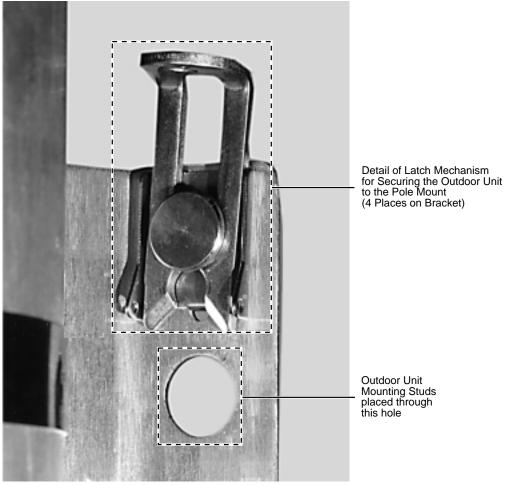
Attaching the Pole Mount Adaptor Bracket
